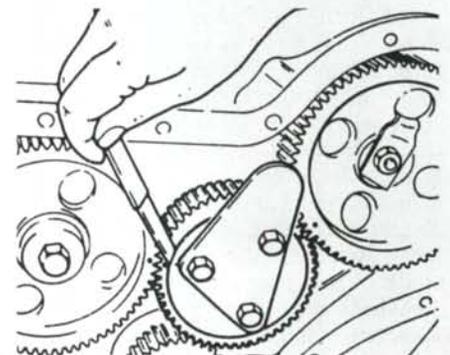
View showing proper position of special tab washer on idler gear. Use a feeler gage to check clearance between gear and retaining plate. Adjust by removing or installing shims.
